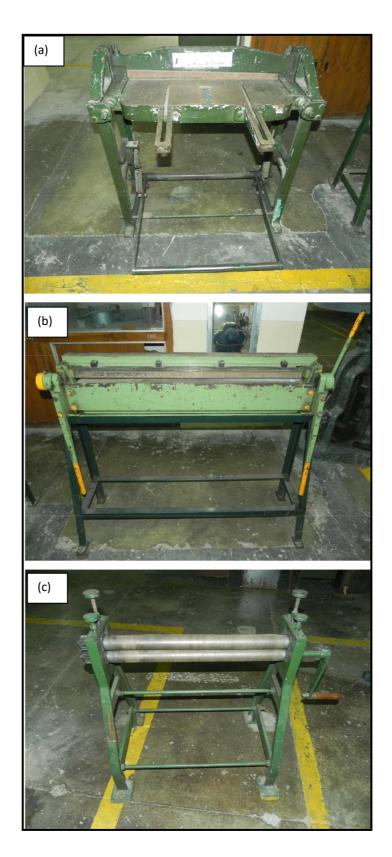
Some of the apparatus available in engineering metallurgy lab to perform sheet metal forming (a) Shearing equipment (b) Bending equipment (c) Folding equipment.
